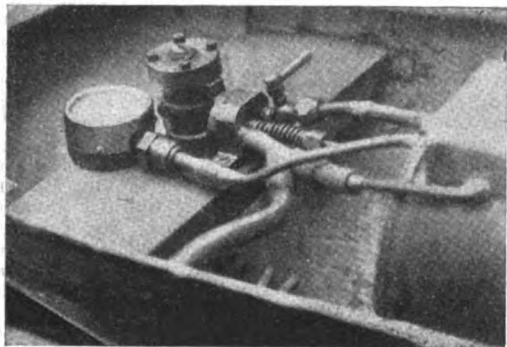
A SIMPLE METHOD OF FITTING AN OSCILLATING CYLINDER TO DRIVE A MODEL SCREW STEAMER.
